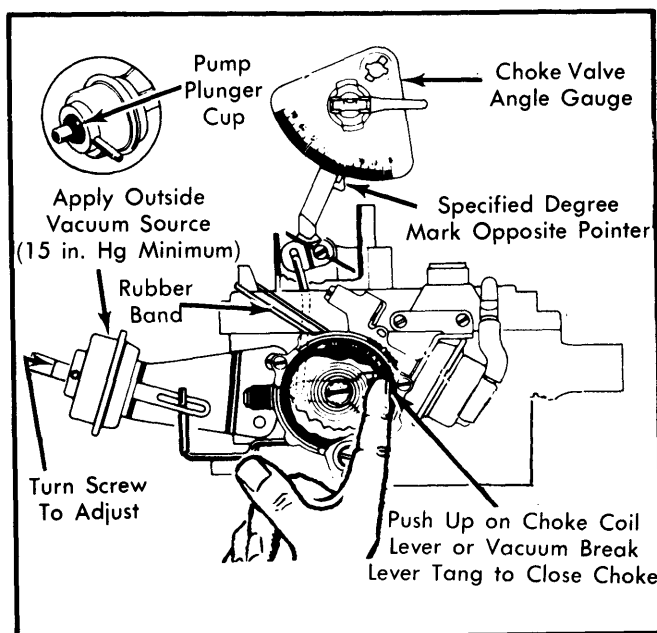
Adjusting Secondary (Rear) Vacuum Break
